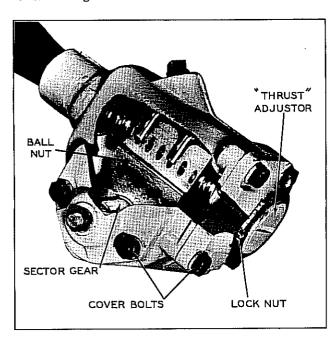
Steering Gear Thrust Adjustment (Worm Bearings)
